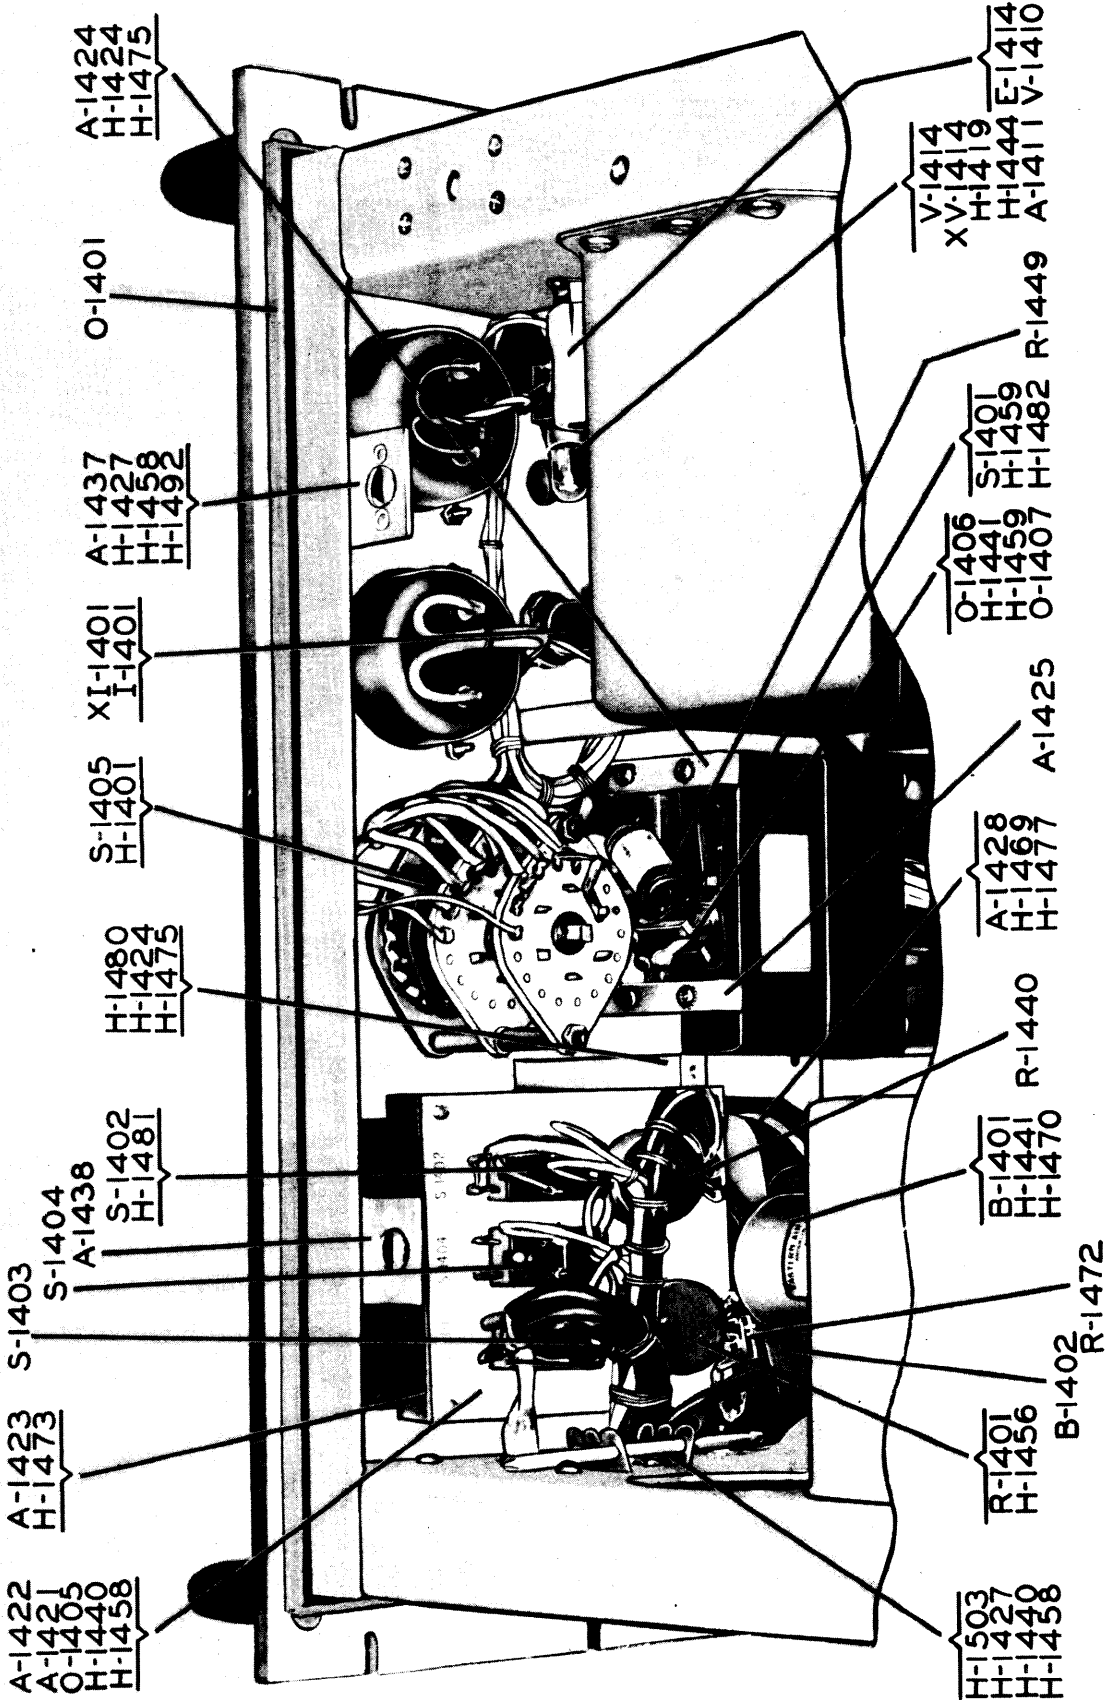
Modulator-Power Supply MD-129/GR, Rear View of Front Panel
